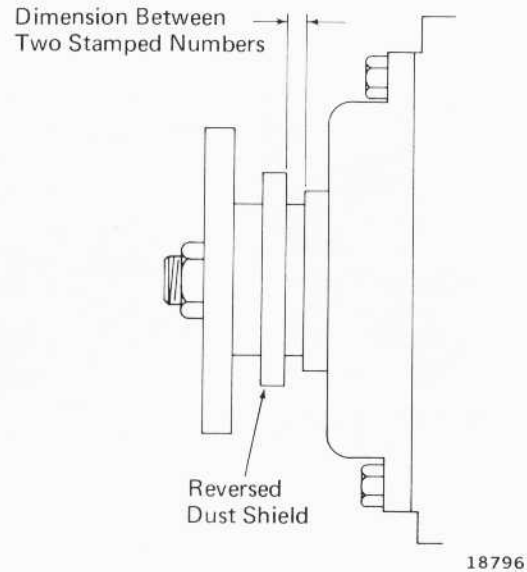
Auxiliary Generator Drive Bearing Clearance
